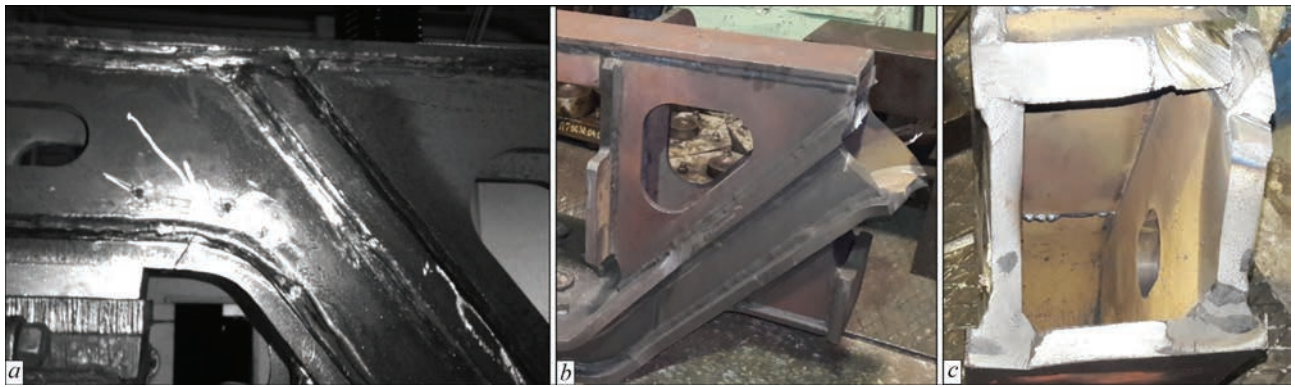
Fragment of fracture of test specimen No.2 of all-welded side frame after macrocrack formation during accelerated fatigue tests (a) and after fracture in the radius blend zone R55 of axial hole (b, c)
